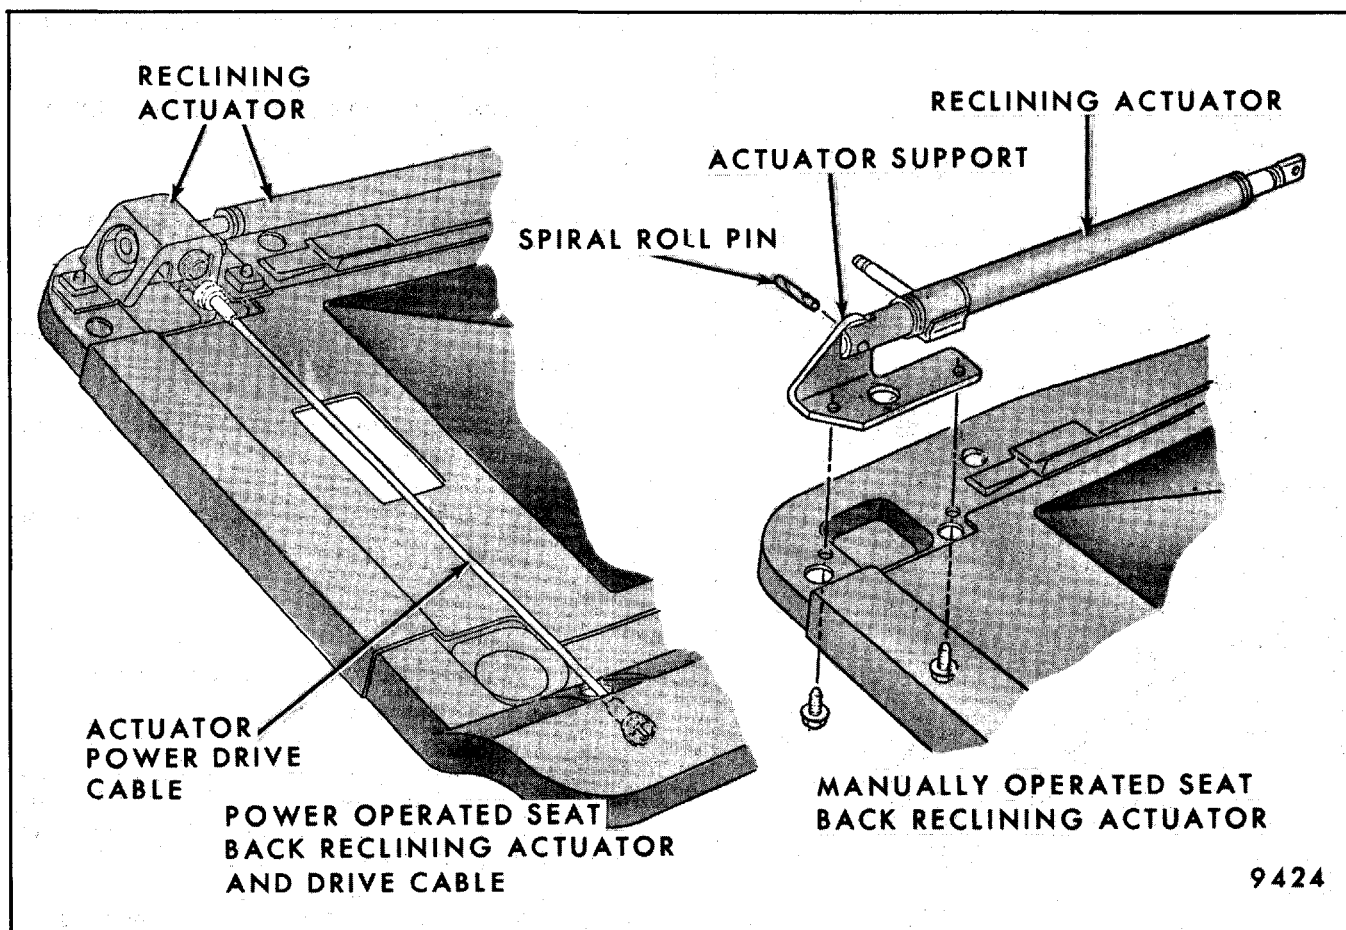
Front Seat Back Manual or Power Operated Reclining Actuator - "B and C" Styles
